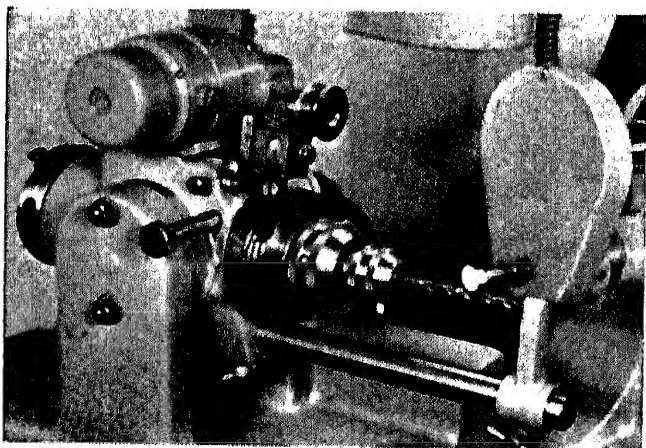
The flutes of a twist drill being ground from the solid on a Monoset cutter and tool grinder. (Courtesy The Cincinnati Milling Machine Co.)
